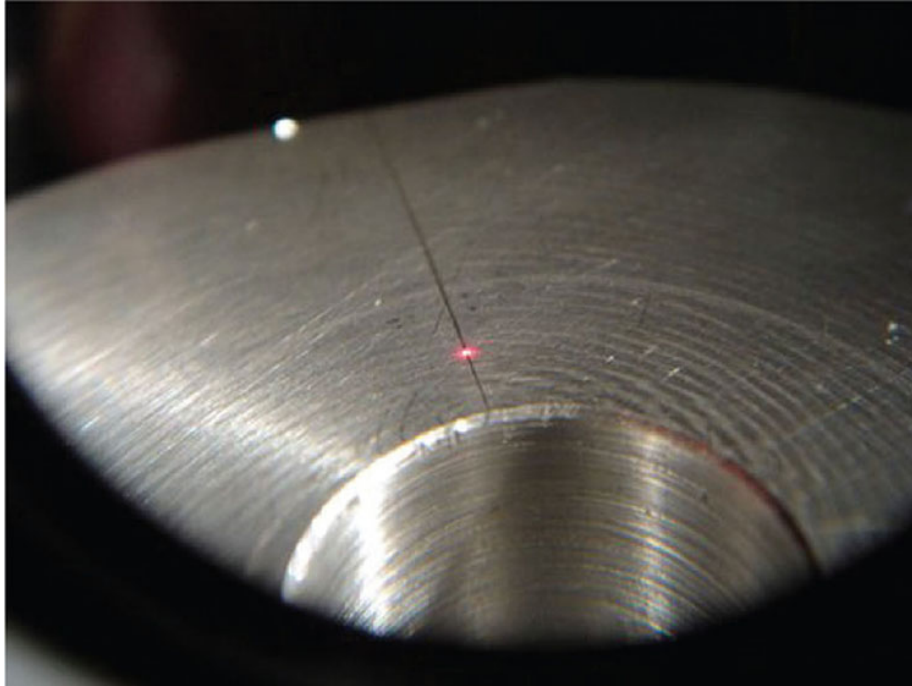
A Laser Centre/Edge Finder without a polarizer, projecting a dot. (Photo: SDA Manufacturing)
